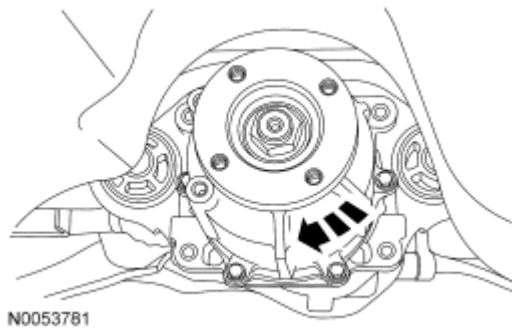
Rotating Rear Pinion 90 Degrees Clockwise
